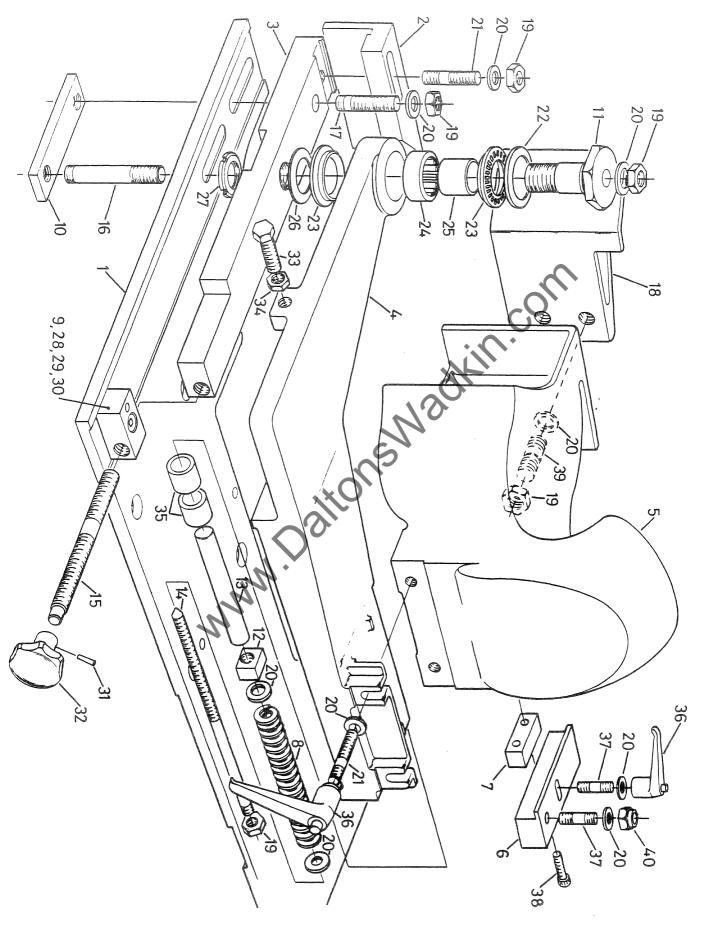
NEAR SIDE HEAD CHIPBREAKER MK III
